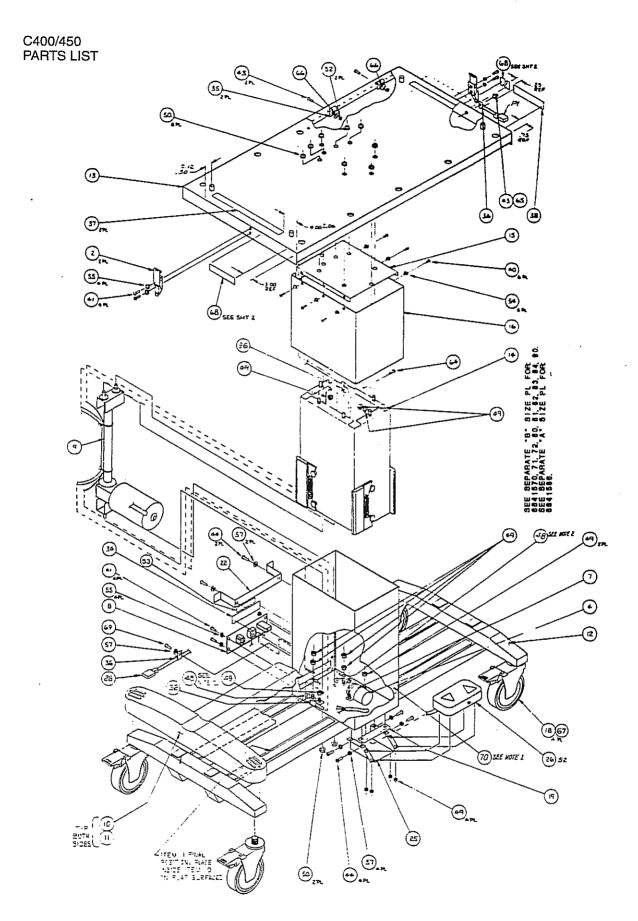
PARTS LOCATION DIAGRAM, VHA STAND ASSEMBLY (SHEET 1 OF 2)
